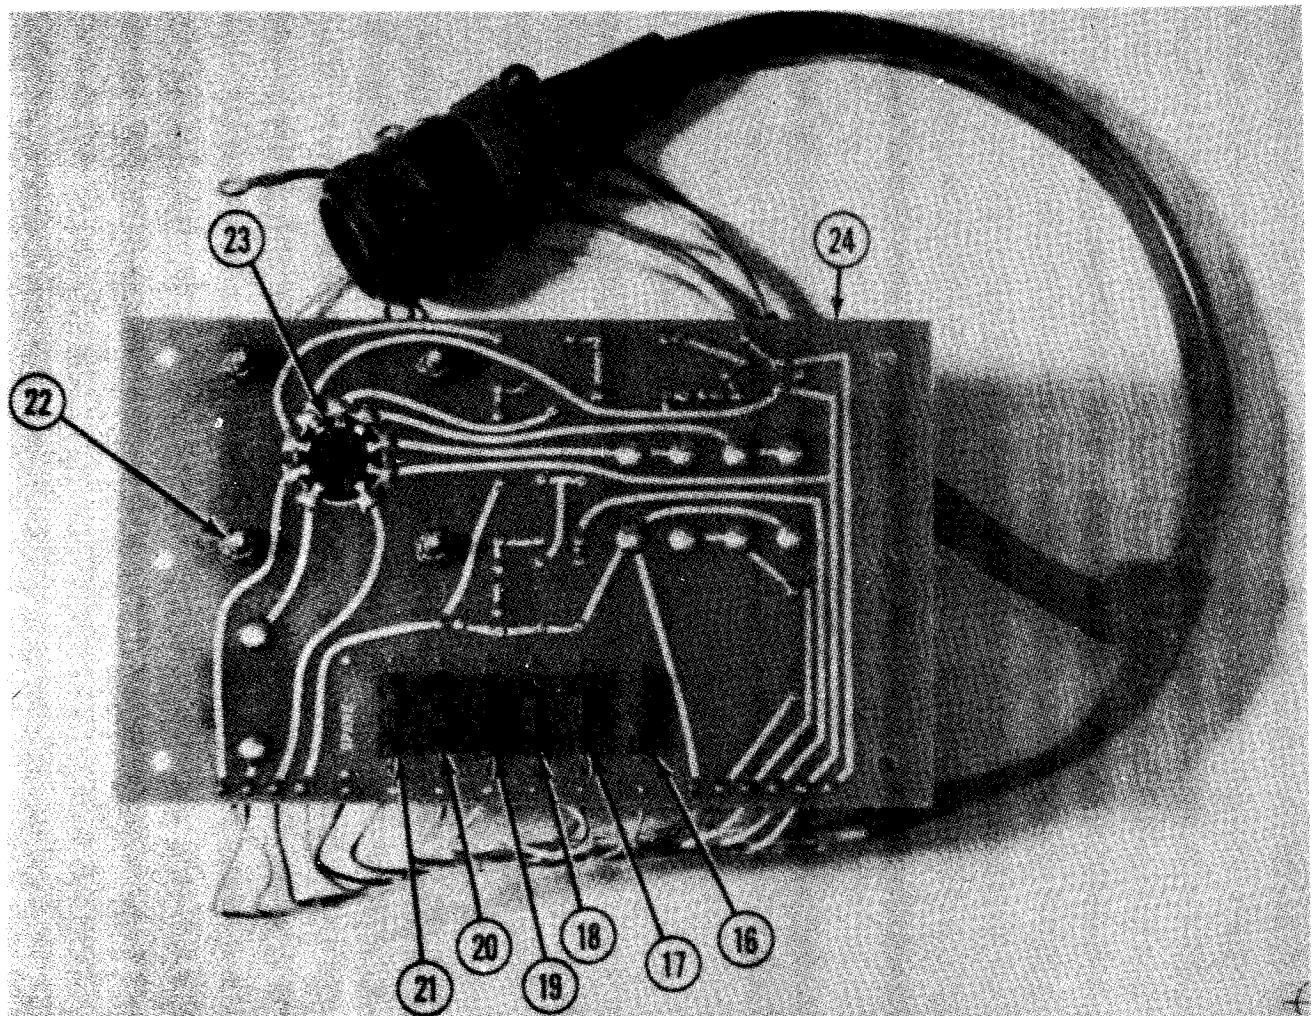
BH1766 circuit board assembly (sheet 1 of 2).
